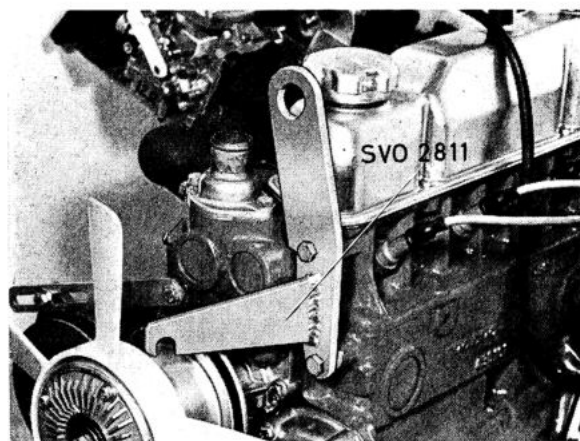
Lifting lug SVO 2811 on engine front end
